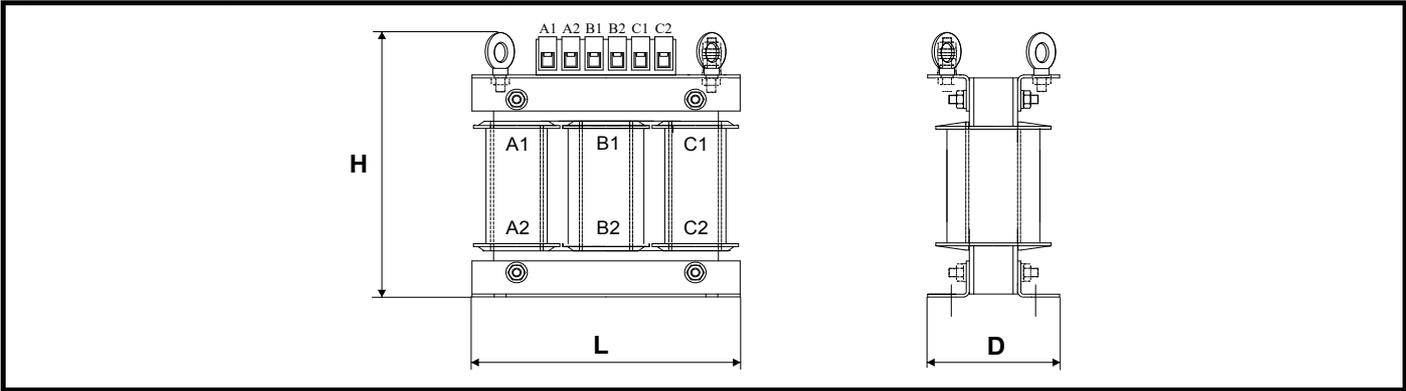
Switching frequency filter inductor type 2 dimensions
